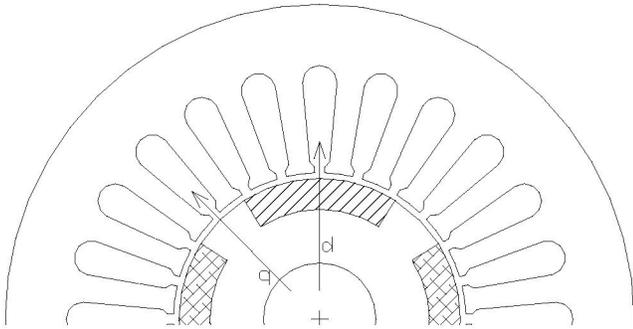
Surface PM Motor with Teeth Between Magnets to Create Rotor Saliency
